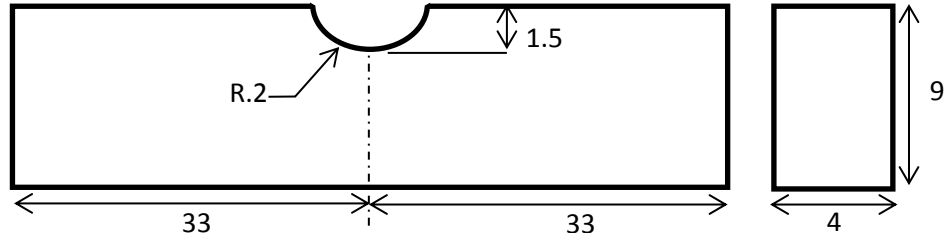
Notched sample geometry (in mm) used for short crack testing.
